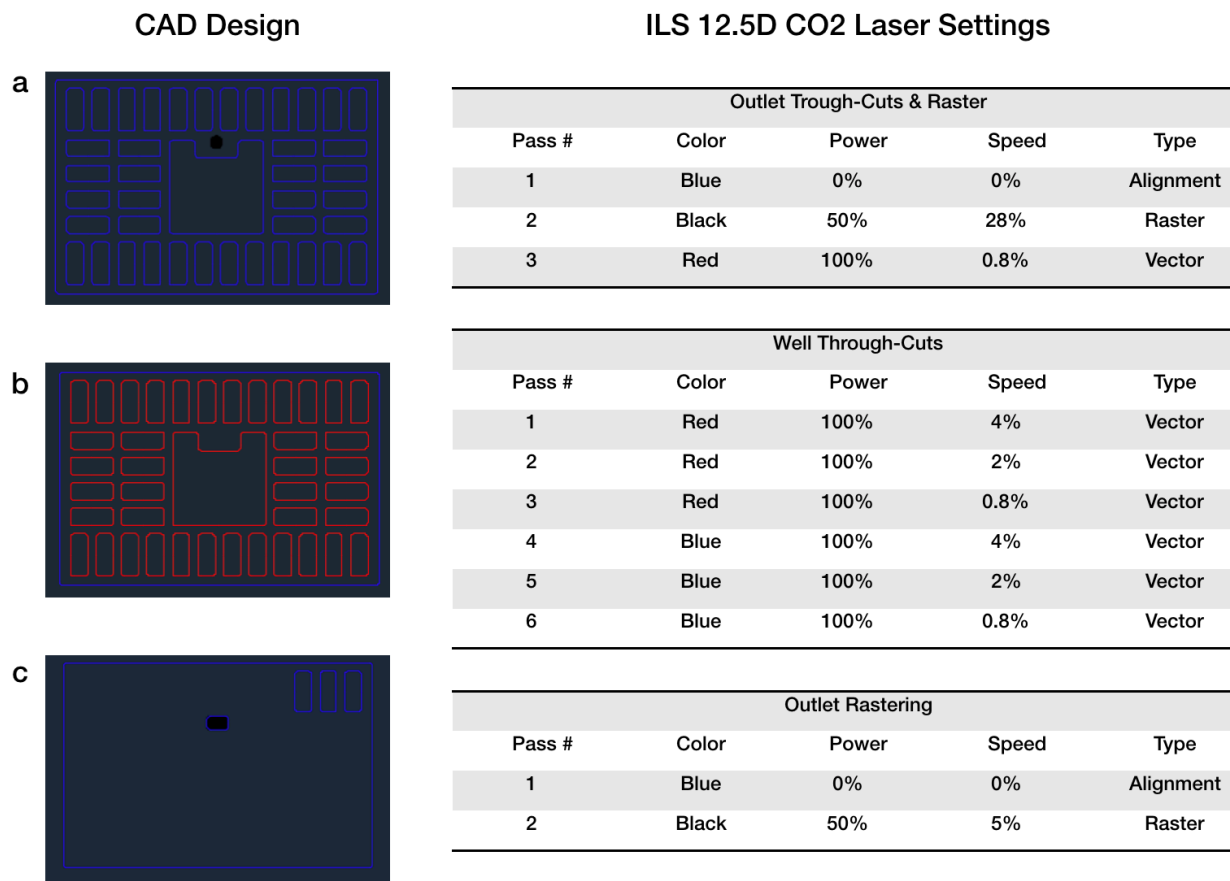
40 well-plate CAD design, fabrication steps, and ILS12.5D CO2 Laser settings. a) CAD design and laser settings for outlet through-cuts & raster. b) CAD design and laser settings for well through-cuts. c) CAD design and laser settings for alignment and outlet raster.
